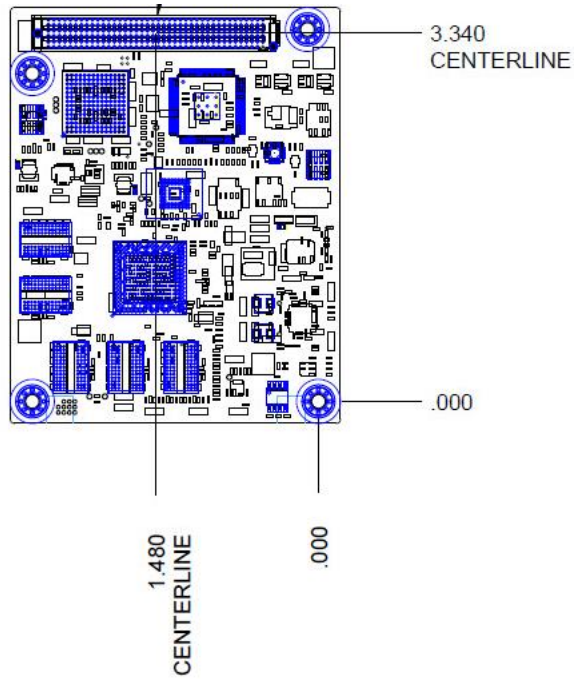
Board Without Cooling Plate (ESR-6300-NCP-K9) Bottom View
